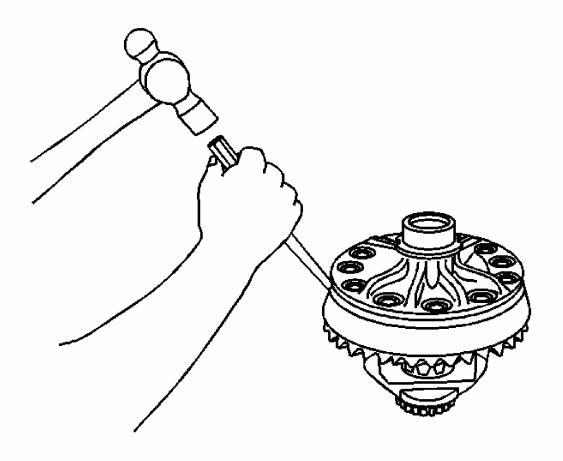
Removing Ring Gear From Differential Courtesy of GENERAL MOTORS CORP.
